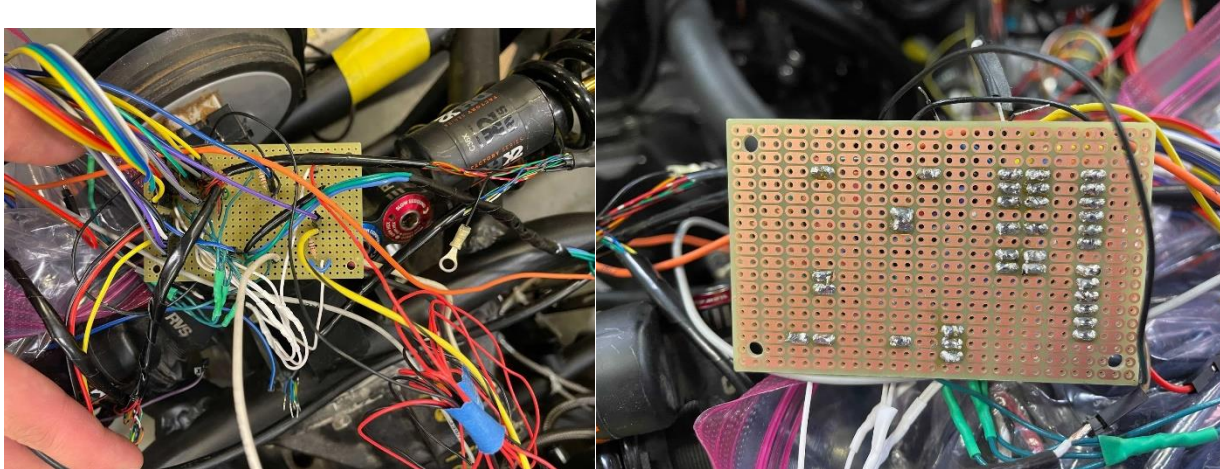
Custom circuit board design. Top view (left) and bottom view (right)
